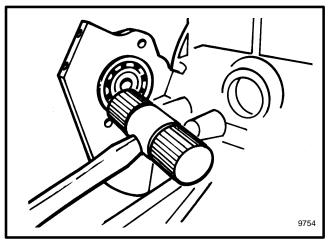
BEARING INSTALLATION, HYDRAULIC PUMP GEAR
